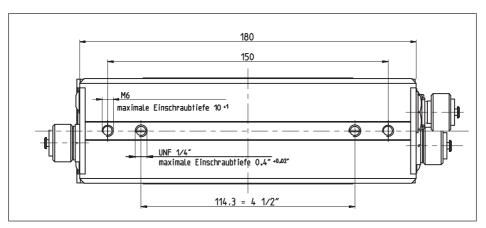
Mounting holes in the stator housing (viewed from below)
